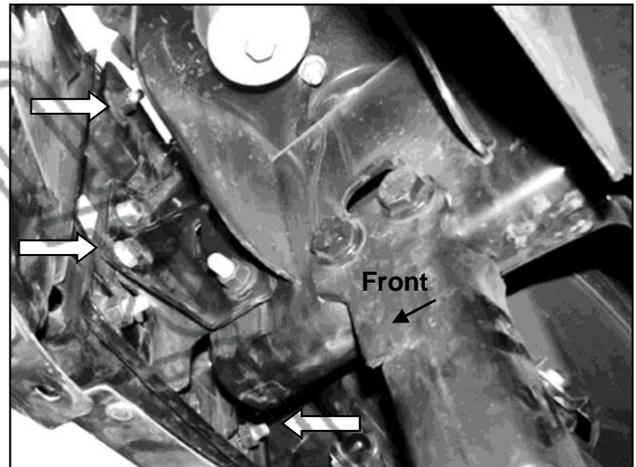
Unplug lights and sensors if equipped. Unplug harness to bumper and move harness
